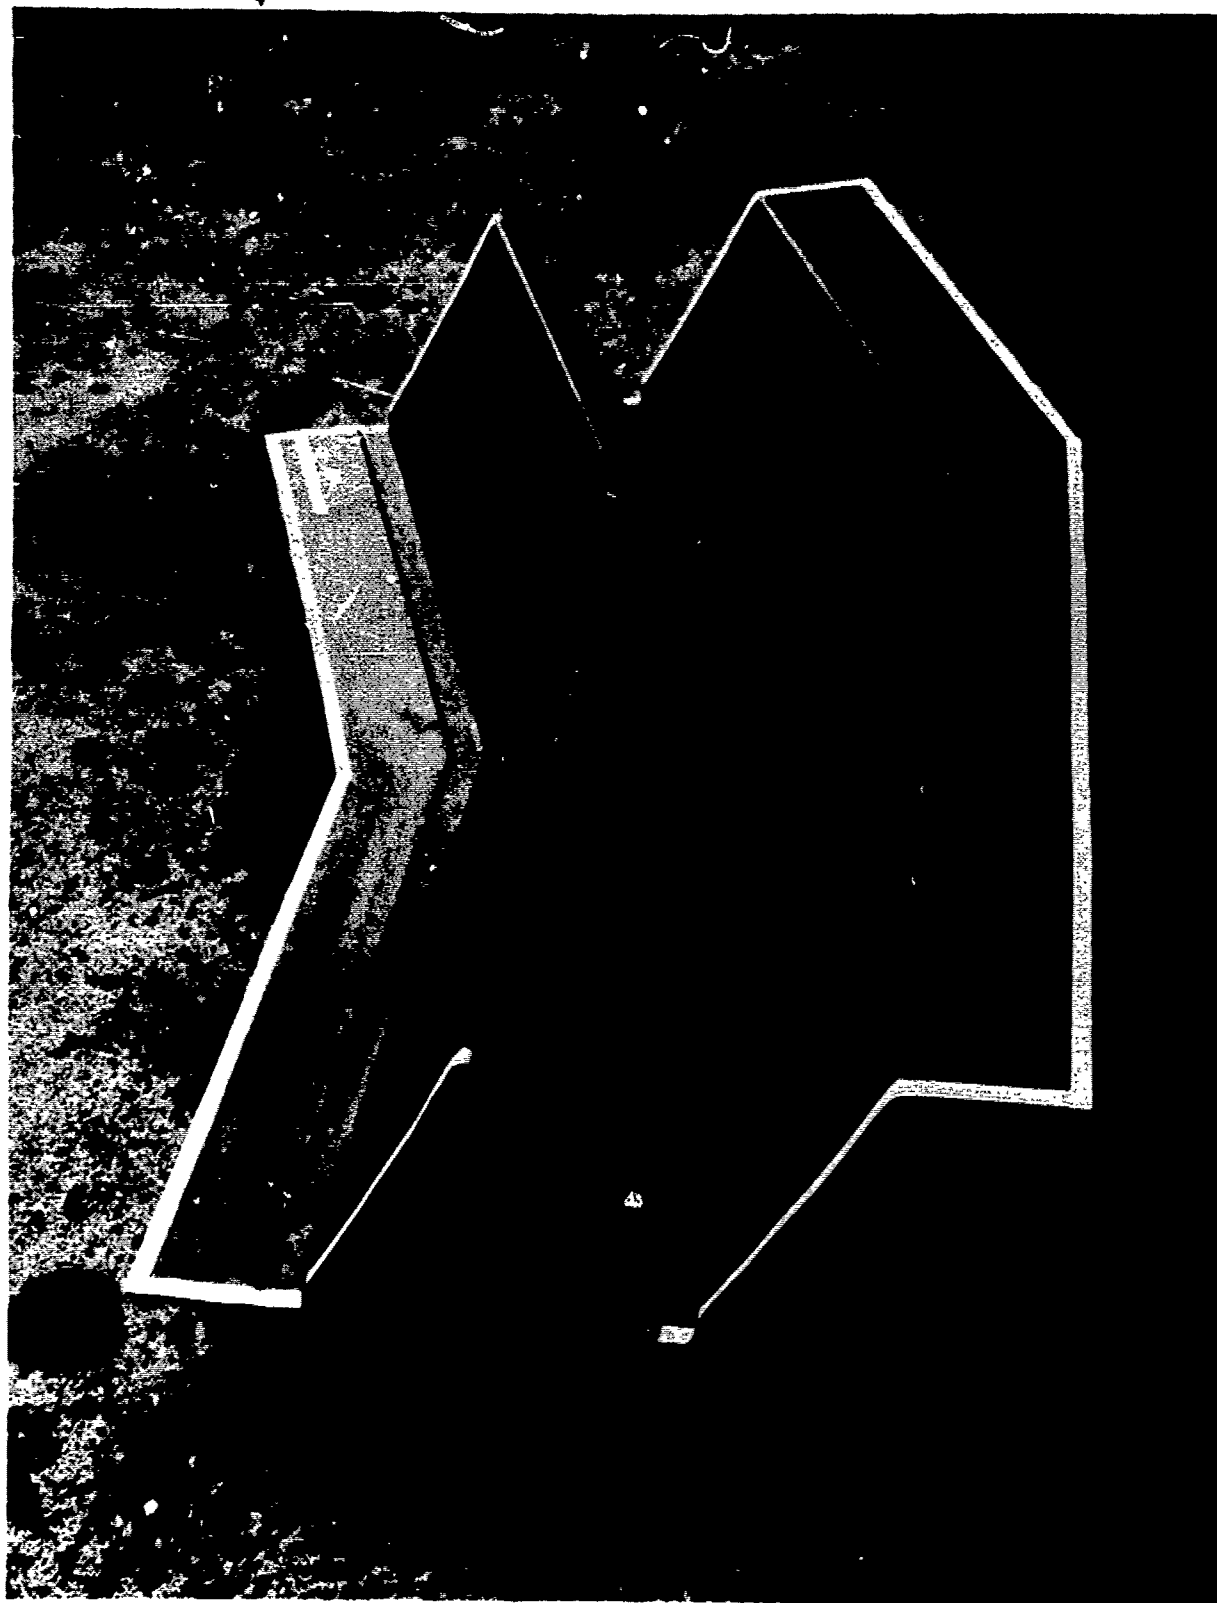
FINISHED LAMINATING TOOL – SWEEP BREAK SPECIMEN TRUSS WEB
